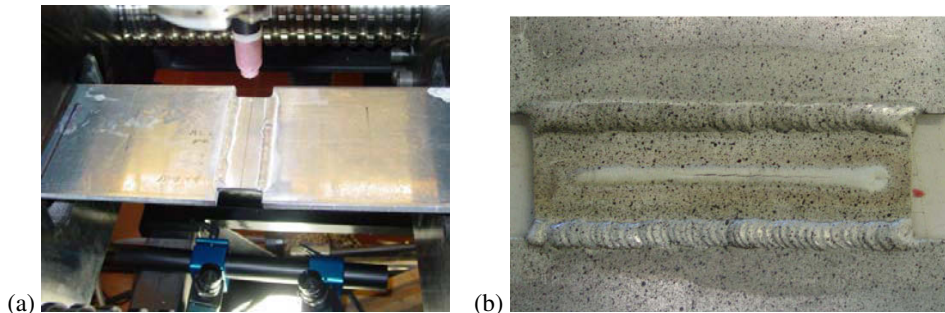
(a) DIC set-up using two cameras to observe CTW test specimen and (b) bottom view of test sample after welding with paint speckle.
